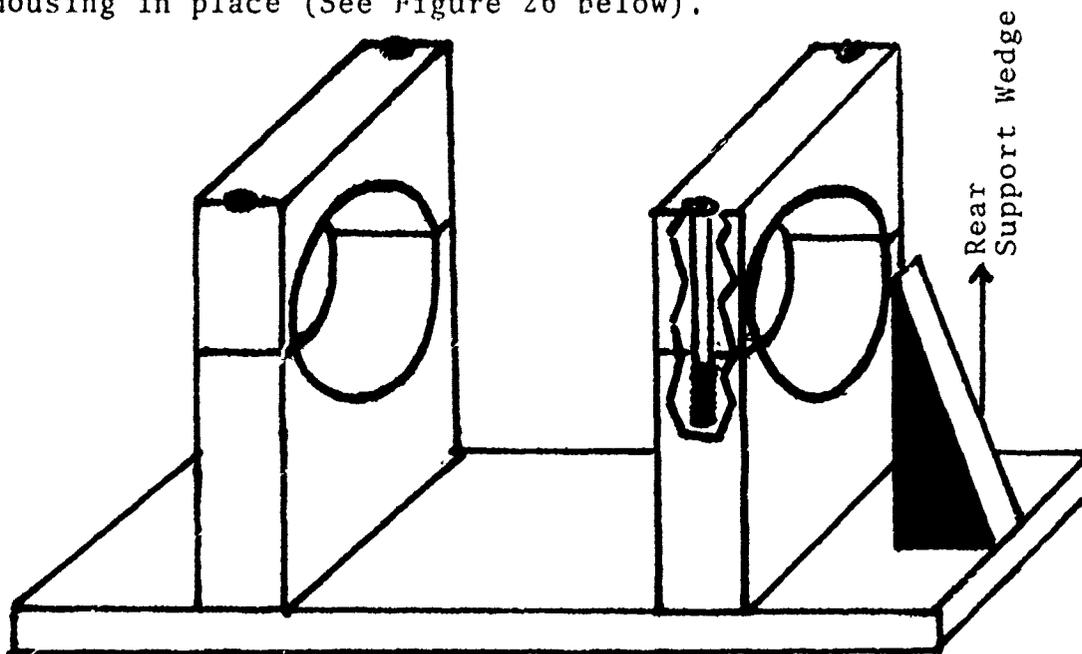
Supporting apparatus used to hold Dukane horn transducer assembly in closure plug.
